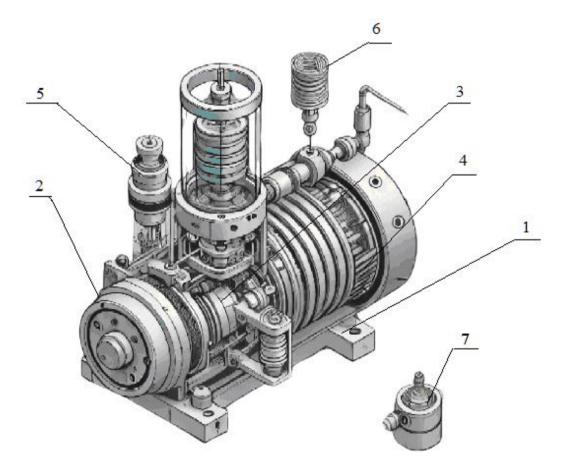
The pump design consists of: 1 - body, 2 - vacuum-pulse chamber, 3 - pistons, 4 - turbine mechanism, 5 - control system, 6, 7 - connections and seals
